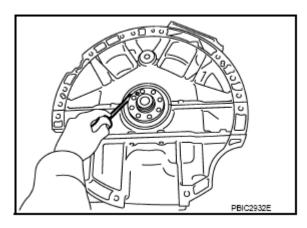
Removing Rear Oil Seal Courtesy of NISSAN NORTH AMERICA, INC.
